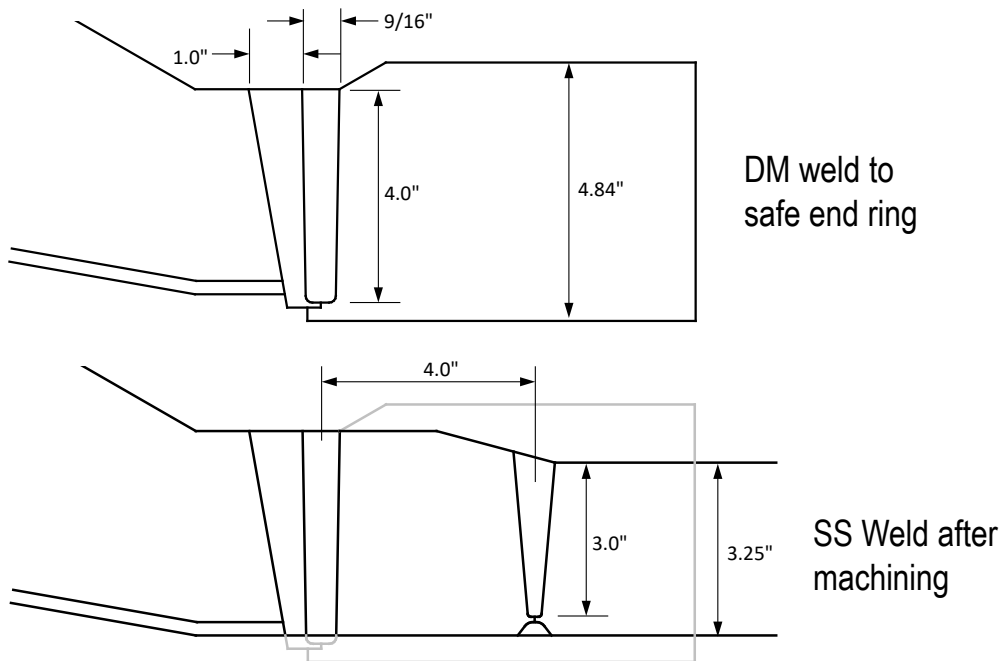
Steam Generator Nozzle Weld Geometry
